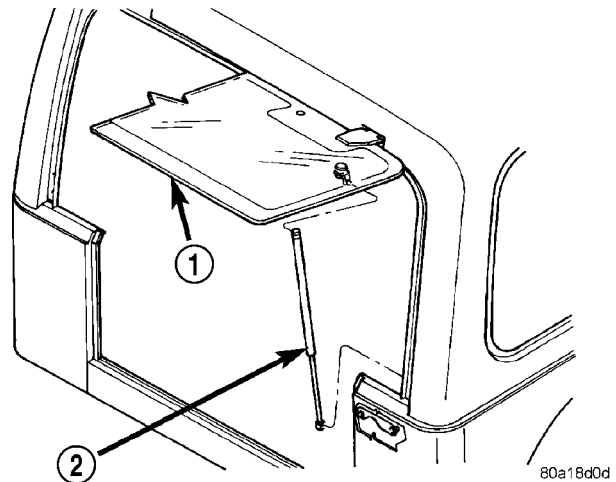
SUPPORT ROD CYLINDER REMOVAL
